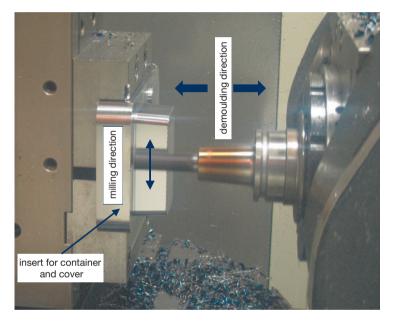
Milling insert [Factory picture: Gebr. Heller Maschinenfabrik GmbH, Nürtingen]
